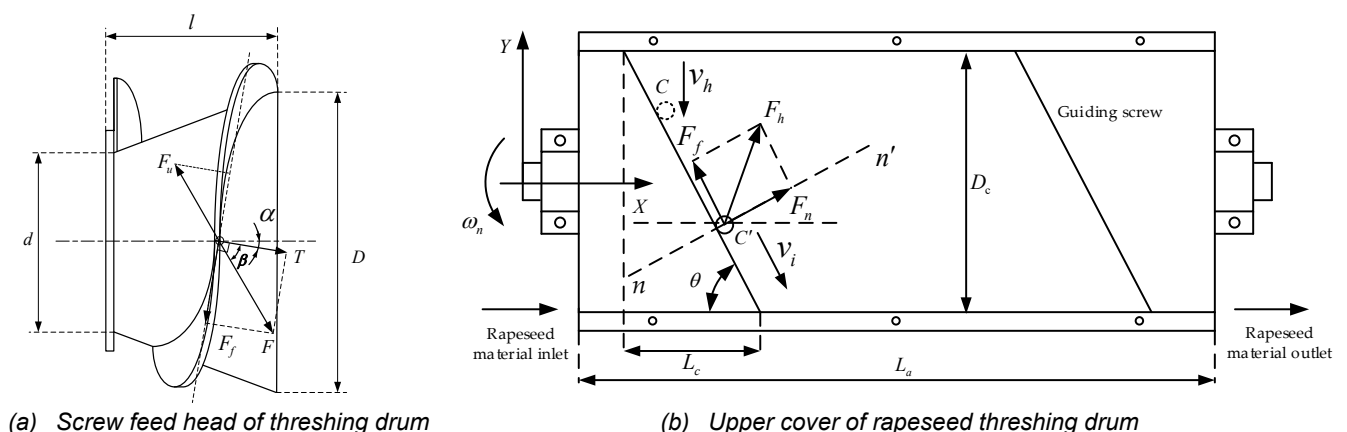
Force analysis of guiding components in the rapeseed threshing drum
